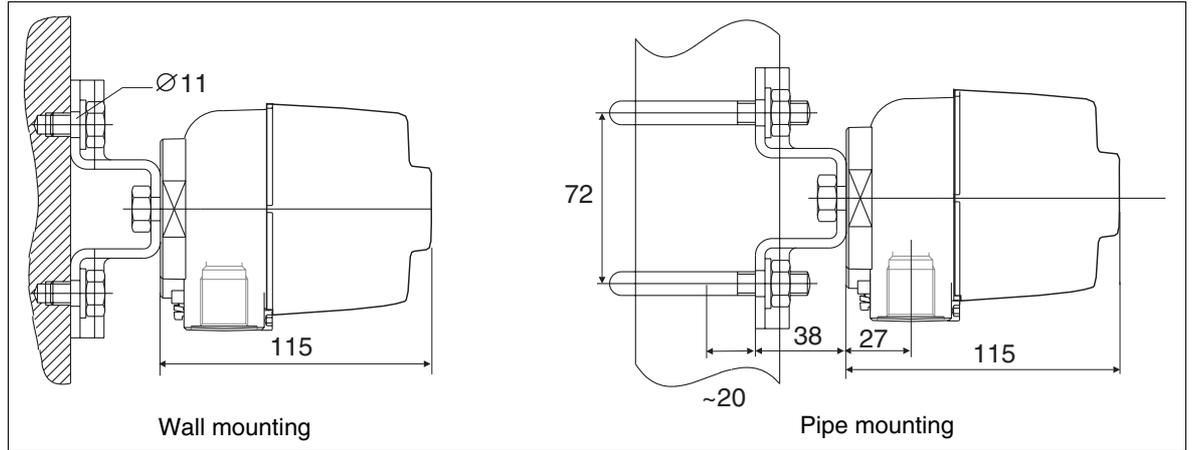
Wall mounting and pipe mounting TF202 / TF202-Ex (all dimensions in mm)
